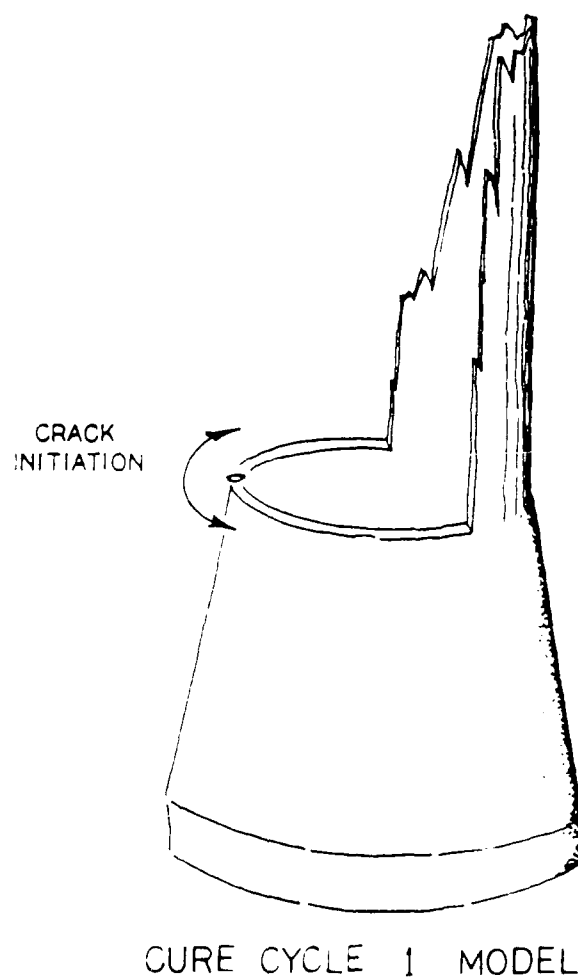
Premature End Failure of SP-328 Tapered Specimens
